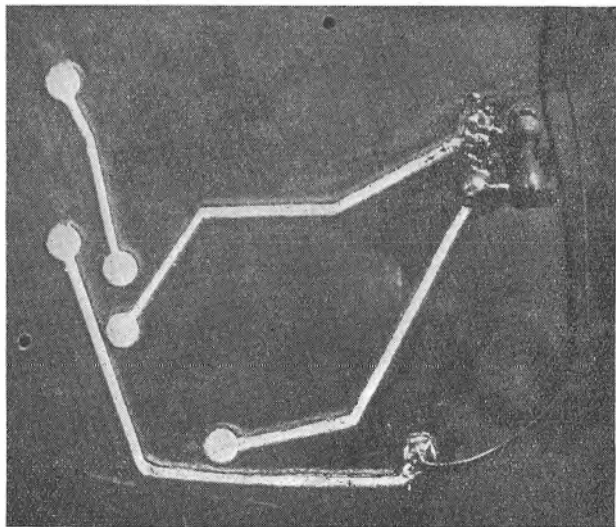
Printed circuit showing miniature resistor and wire soldered directly into the circuit
